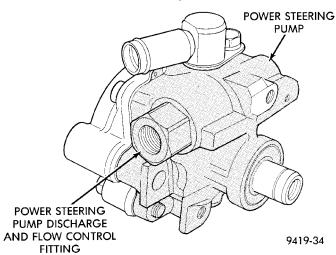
Pump Discharge And Flow Control Valve Fitting
